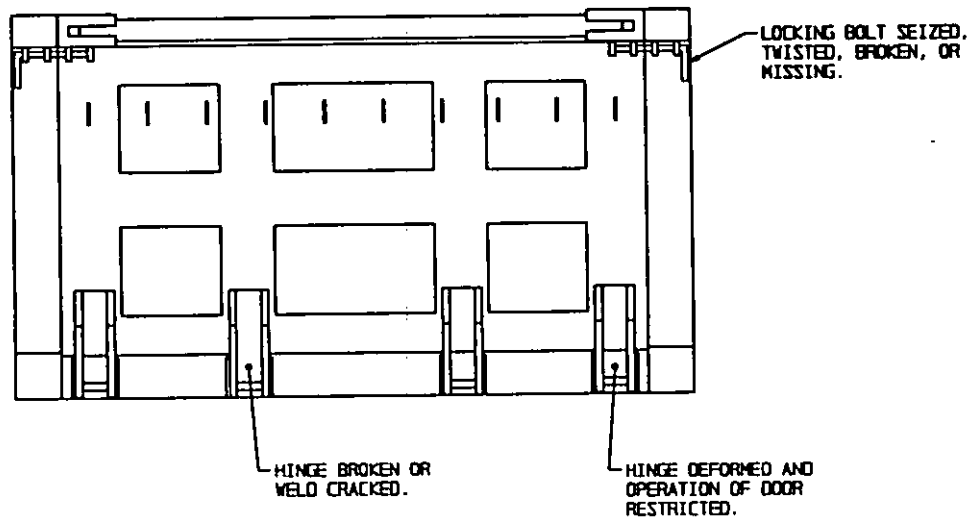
RAMP TYPE DOOR DAMAGE
